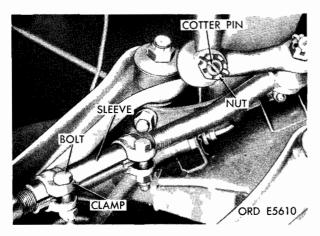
Idler arm bracket, idler arm, and idler arm bushing removal
